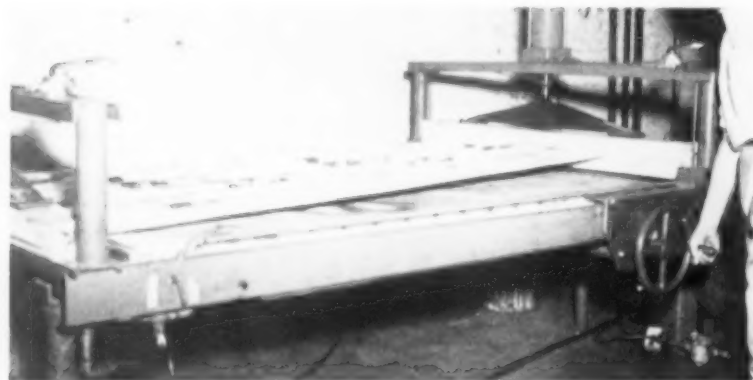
Operator demonstrates stretching of drape on horizontal machine
